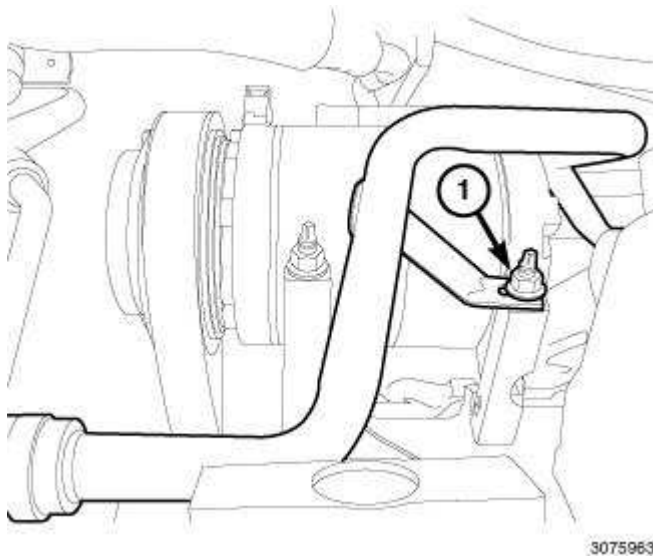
Heater Core Return Tube Lower Support Bracket Retaining Nut
